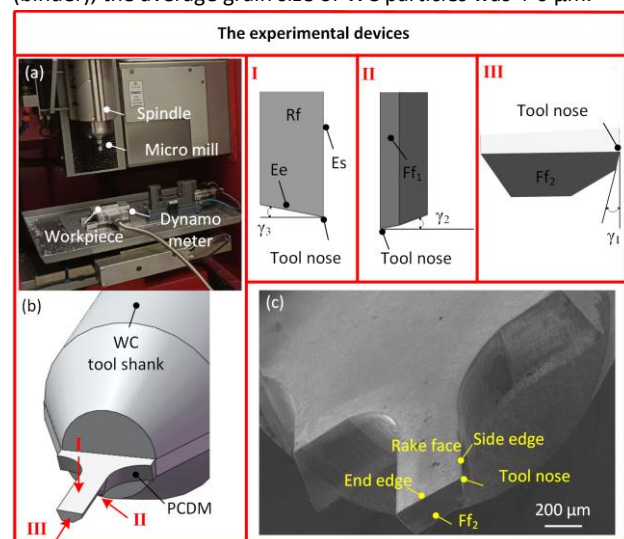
The experimental devices: a) milling machine, b) and c) self-fabricated diamond micro mill.
